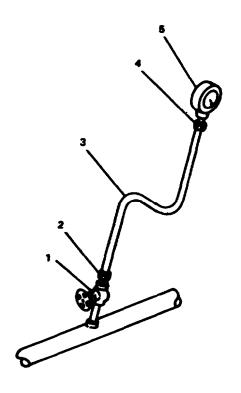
Repair Piping Gauge Assembly (Typical Single).
